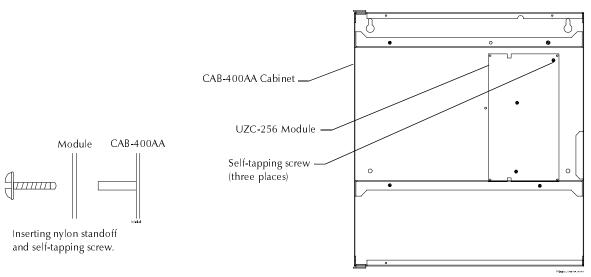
Mounting the UZC-256 into a CAB-400AA Cabinet
